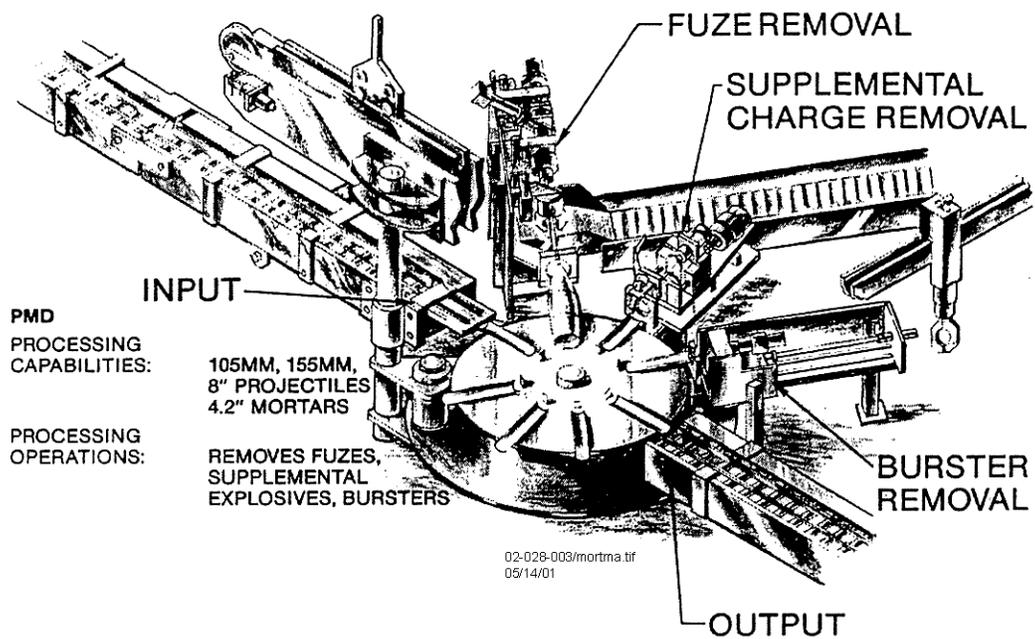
Figure Attachment D-1-2. WHEAT Projectile/Mortar Disassembly Machine
